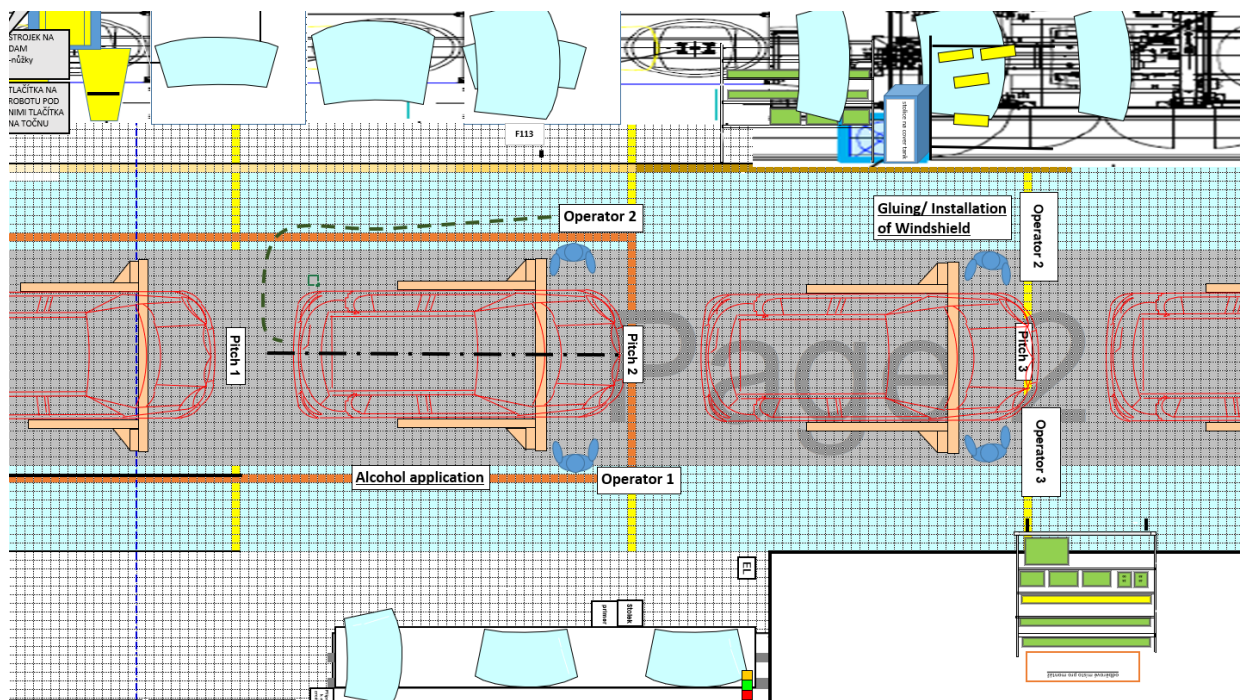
Workplaces for body flange degreasing and glass installation.[62]
